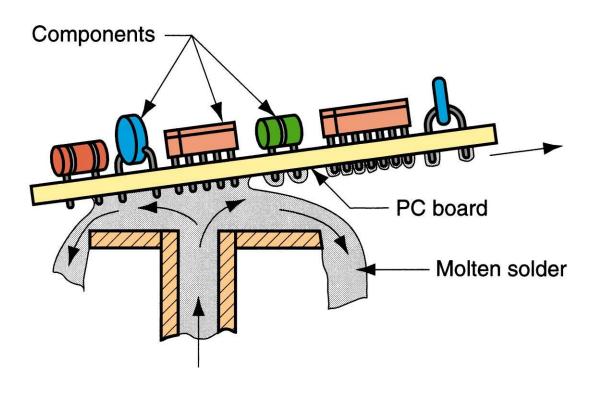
Wave soldering, in which molten solder is delivered up through a narrow slot onto the underside of a printed circuit board to connect the component lead wires.
